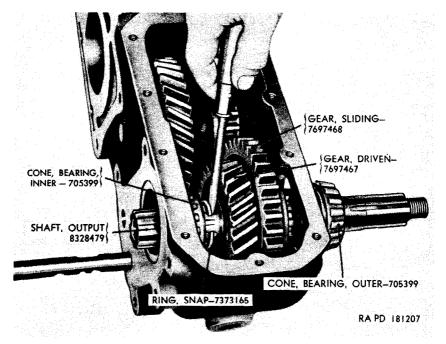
Removing thrust washer snap ring from transfer rear axle output shaft.
